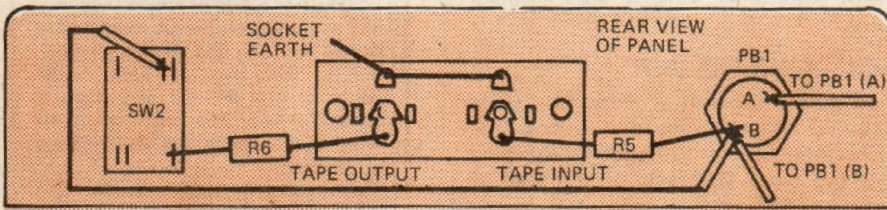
This drawing shows components and wiring on the front panel of the unit.
